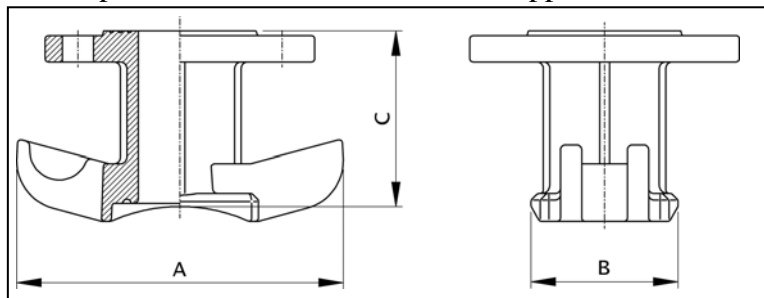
Universal drill-clamp with flange pipe size 2" DN 40/50 PN 4 / 58.0 psig (gas) / PN 16 / 232.1 psig (water)
